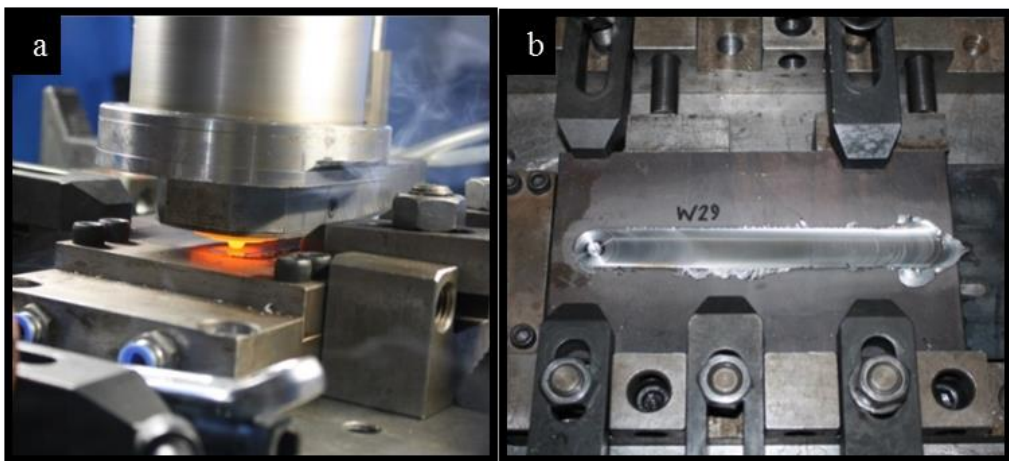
Optical images of a) FSW of APMT in progress and b) the completed weld. (Images taken at TWI Rotherham UK)
